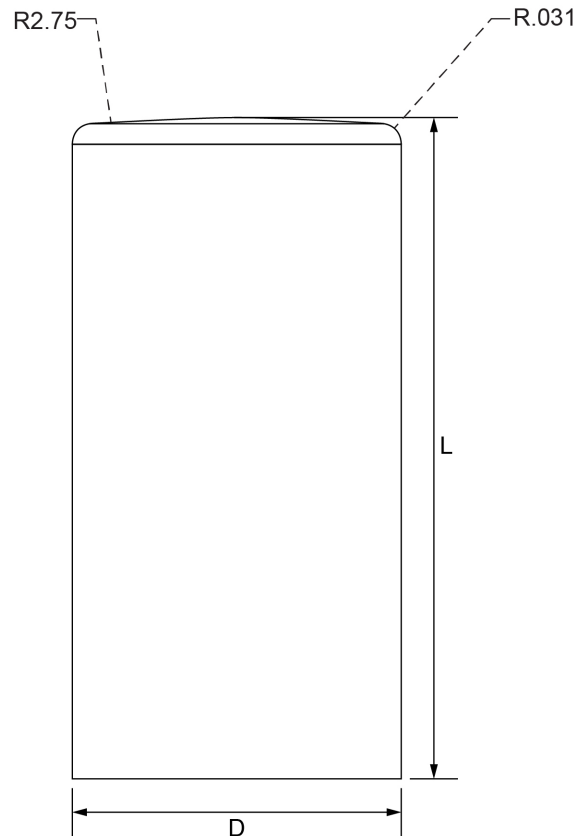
Sample small panel projectile. Length, L, and diameter, D, vary depending on test specimen thickness and material. Dimensions in inches; radius, R.
